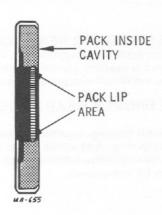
PACKING GREASE SEAL AREAS WITH LUBE
